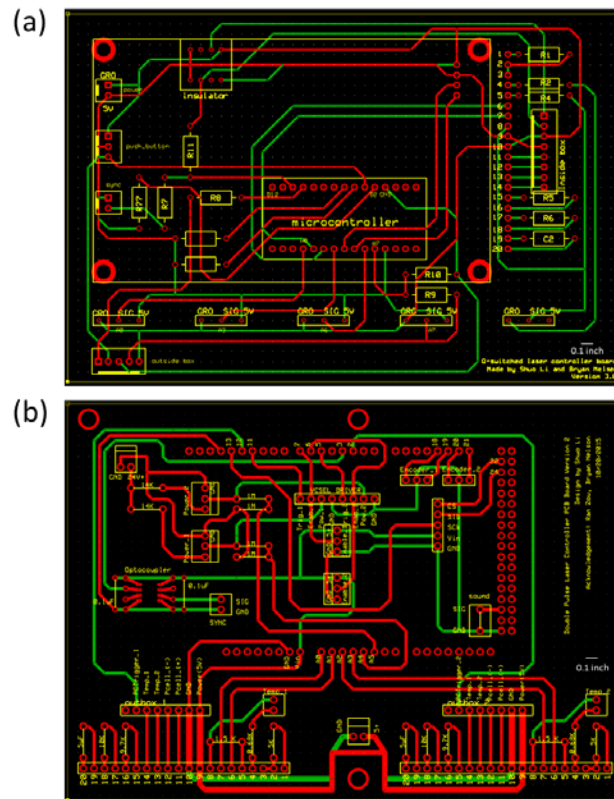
PCB of single-pulse and double-pulse laser controllers
